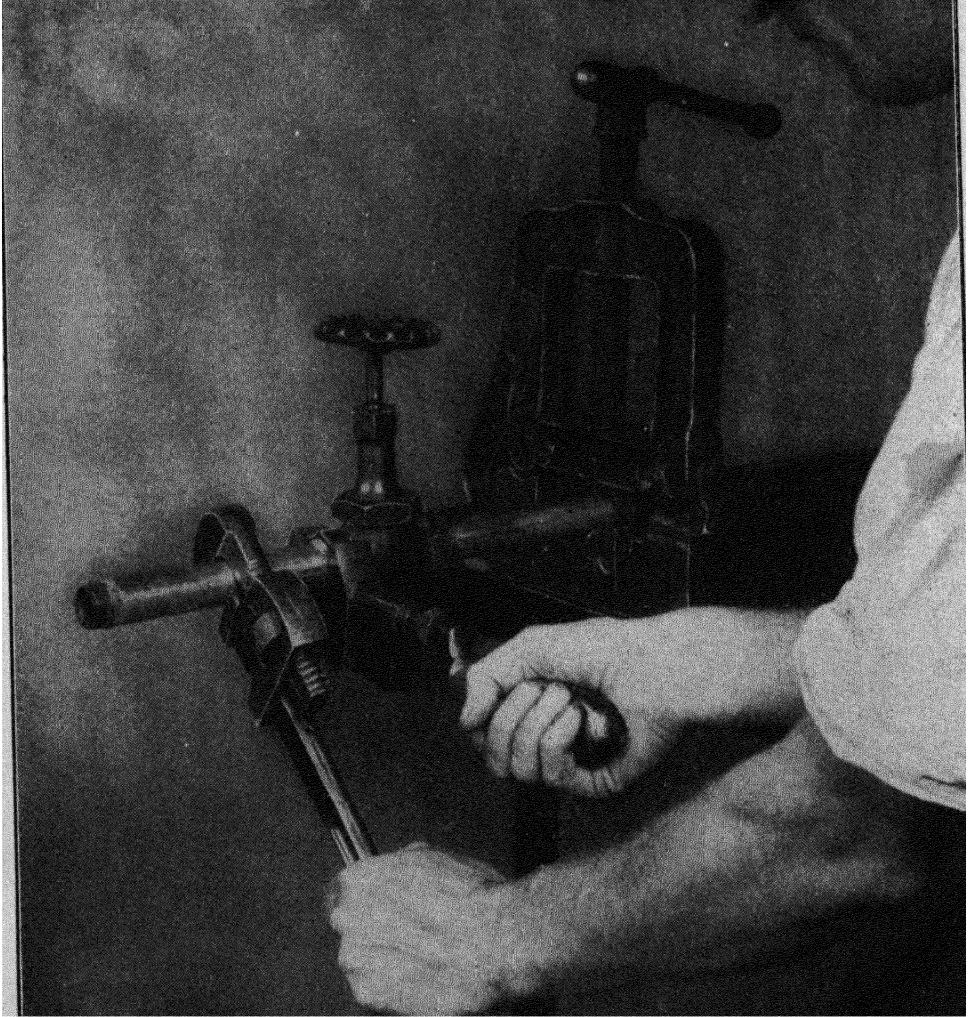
Proper method of screwing a piece of pipe into a brass valve.
